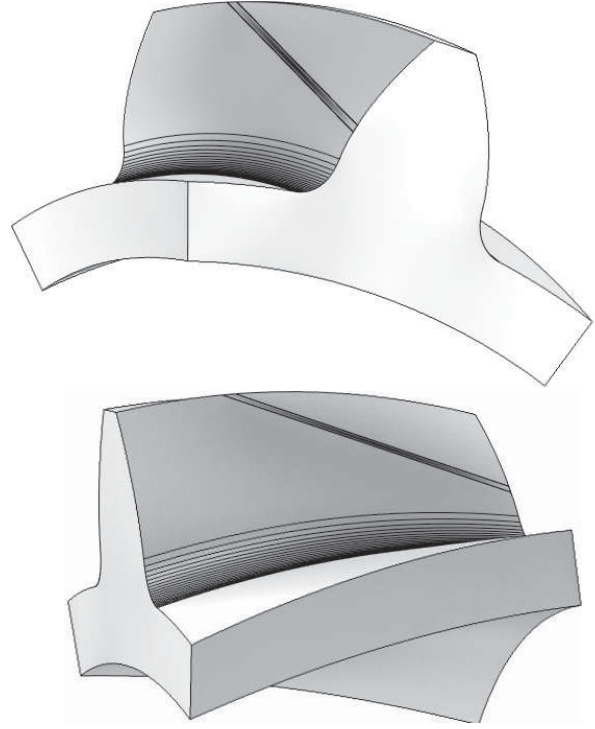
Example of loaded helical gear tooth. The contact is here illustrated to lie between the two lines on the tooth face.
